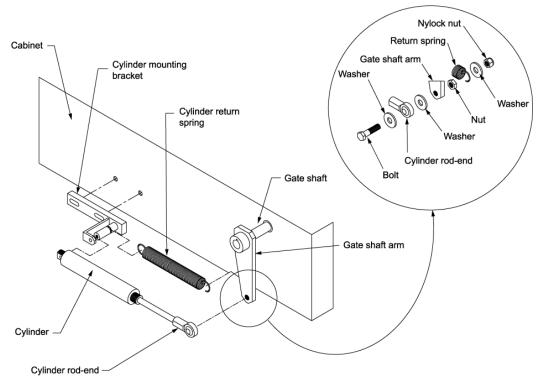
Cutoff Gate Cylinder and Associated Components
